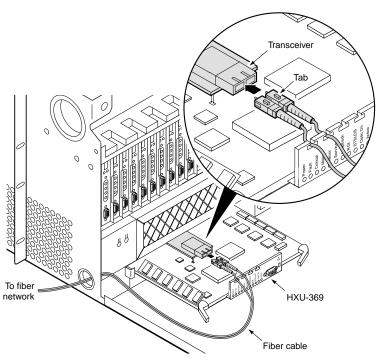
Routing OC-3 Fiber-Optic Cables Through the Lower Access Hole (Left-Hand Side, Front View)
